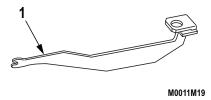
Vertical Cam Assembly and Primary Drive Lever Inspection.
